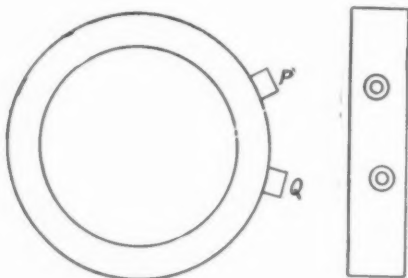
SPECIAL JIG USED FOR DRILLING HOLES IN FRANCIS CUTTER
